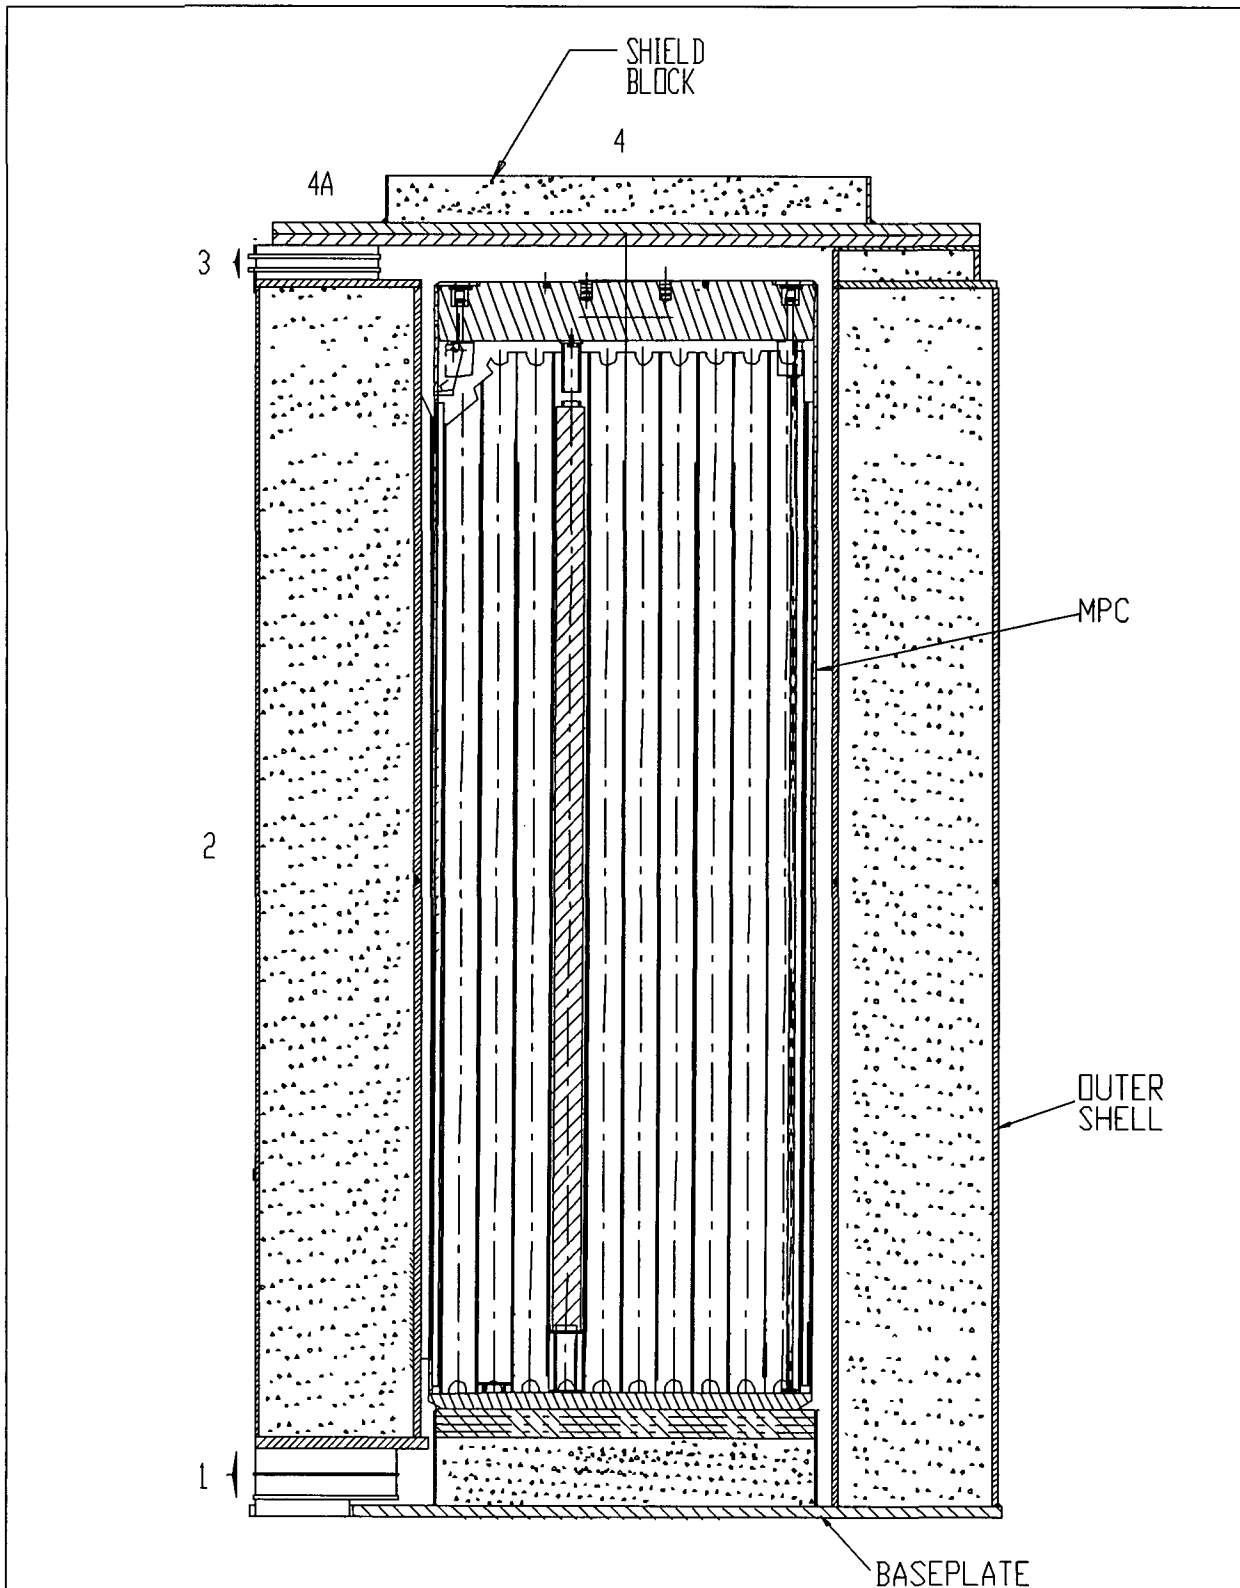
; CROSS SECTION ELEVATION VIEW OF THE HI-STORM 100S OVERPACK WITH DOSE POINT LOCATION
